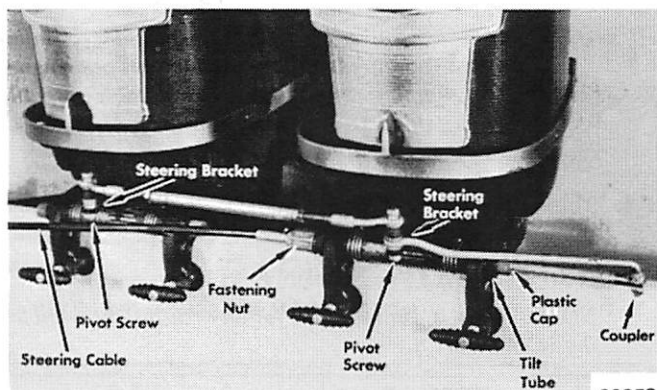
Attachment Kit Installed, Merc 1100-1000-950-900 and 4-Cyl. 650 (1966 and Newer) Models
